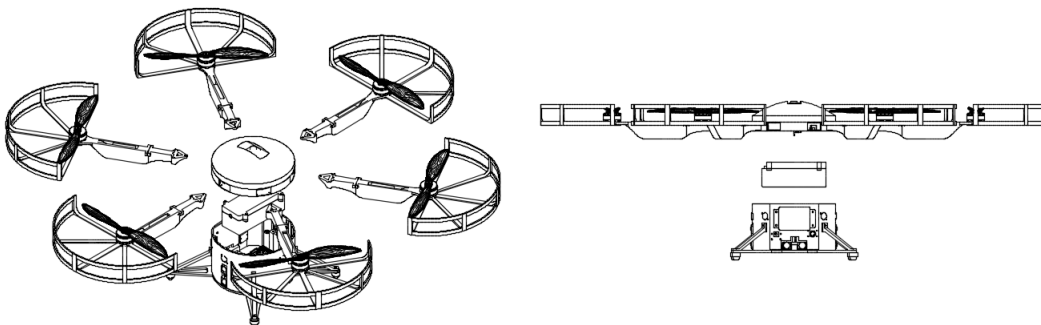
Left: Perspective view of a partly exploded view of the drone showing the six propeller units, the main unit, the battery unit and the sensor package unit. Right: Front view of a partly exploded view of the drone.
